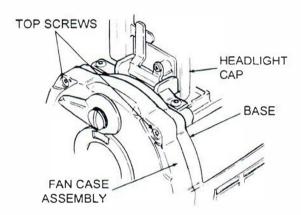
Headlight Cap/Slide Bracket Assembly/Handle Pivot Assembly
